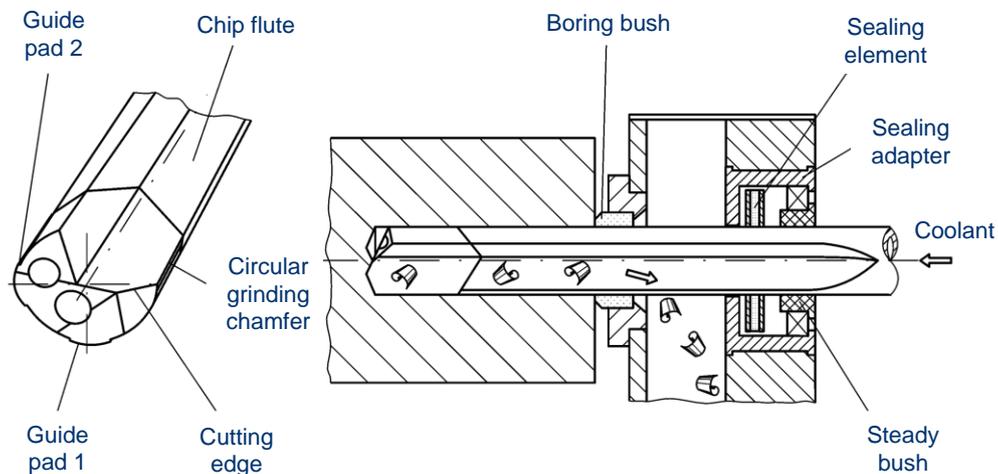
Schematic illustration of the single-lip deep hole drilling [5]
